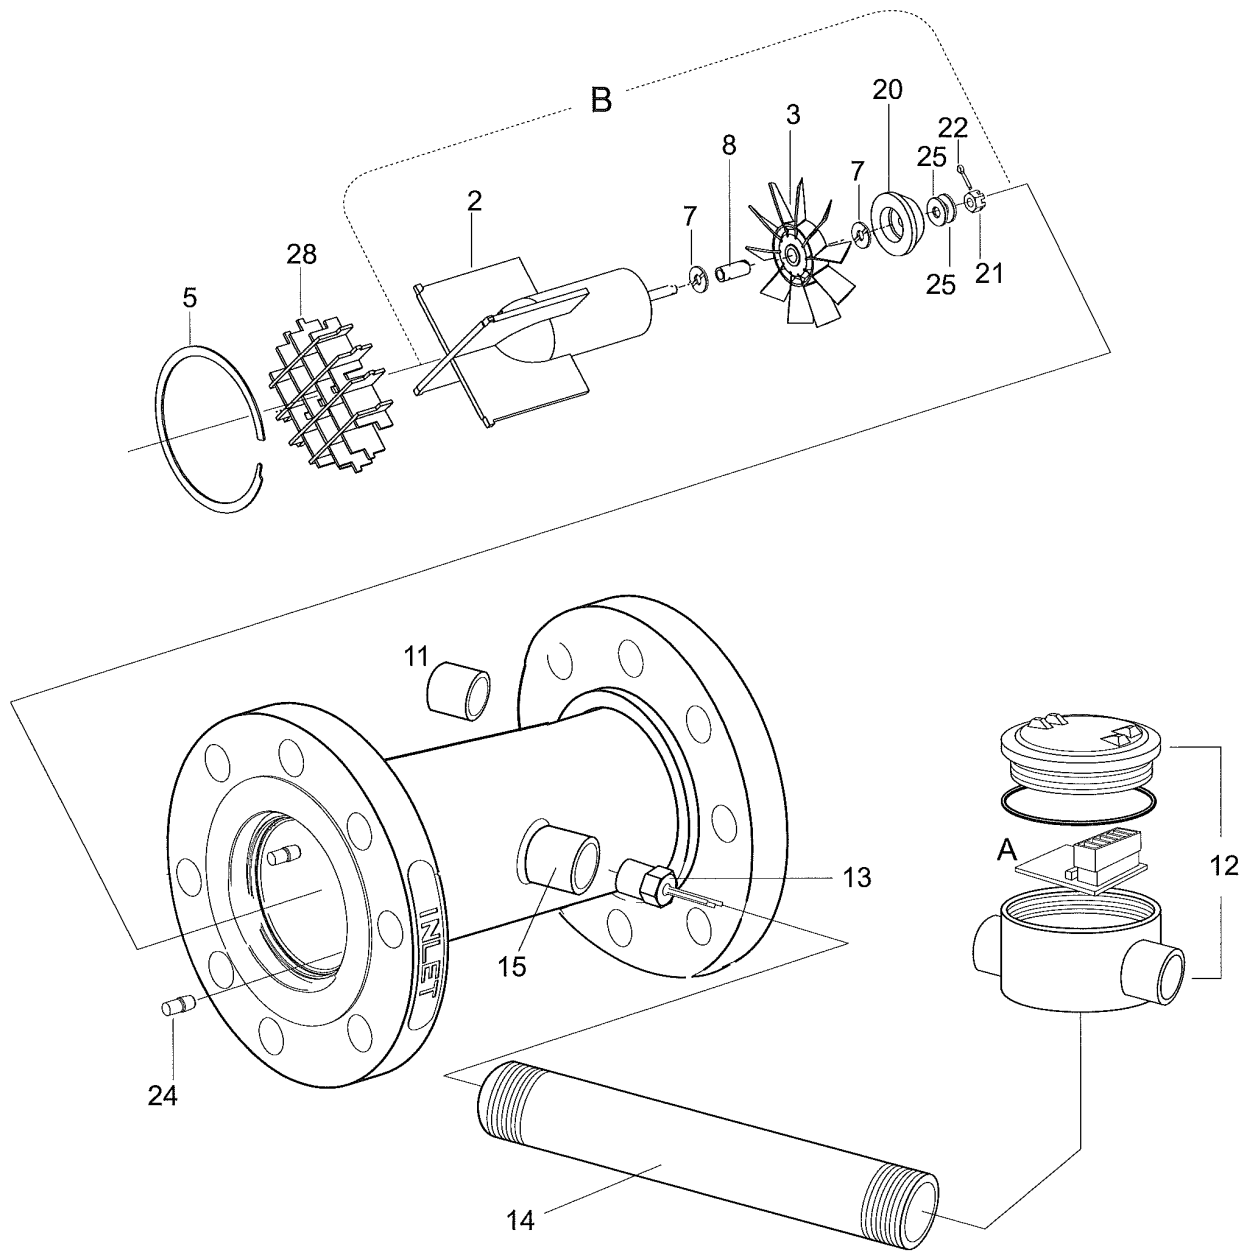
3" and 4" Sizes Assembly Illustration
